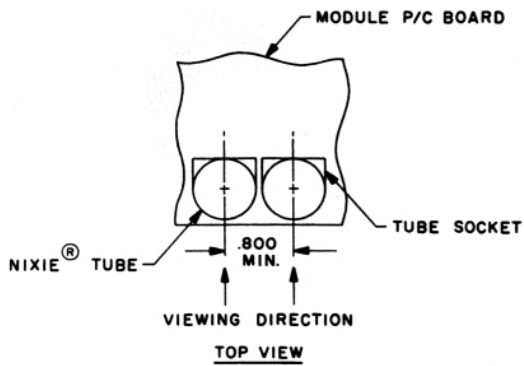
SERIES MOUNTING ON DRIVER MODULE BOARD
